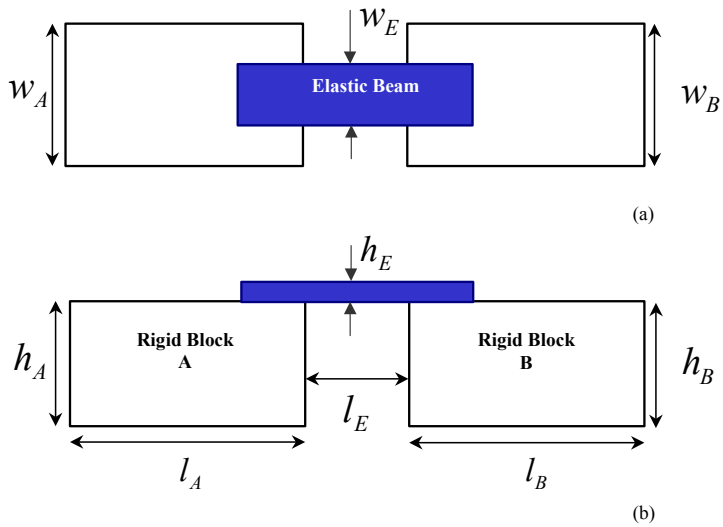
Dimensions of integral case C0. (a) Plan. (b) Elevation.
